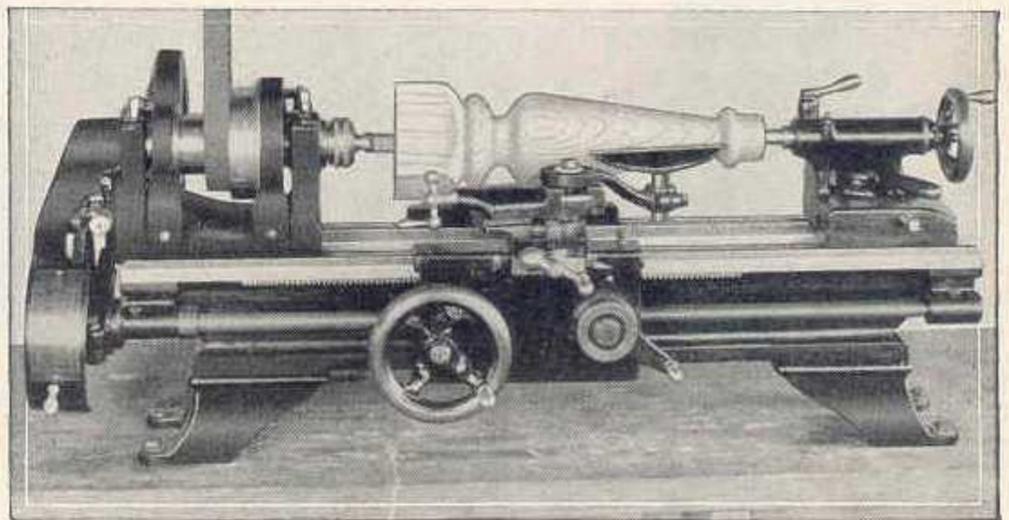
9-Inch Junior Lathe Equipped for Wood Turning.
